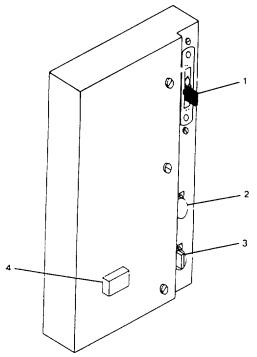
<u>Steering Hydraulic Pump Motor Controller</u>. 2-114
